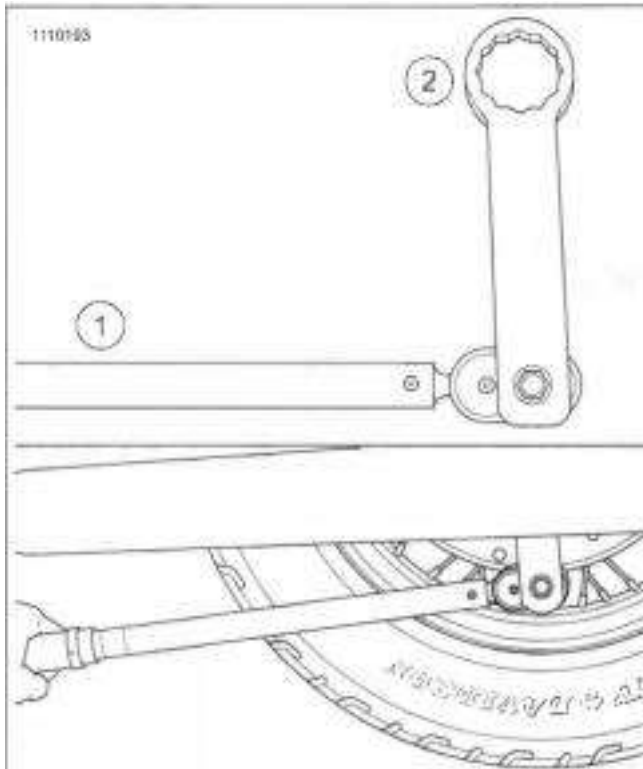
Install Tool Perpendicular to Torque Wrench
